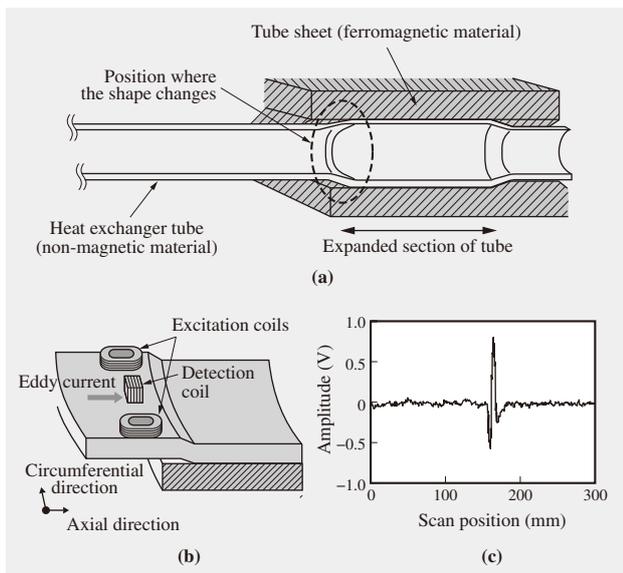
Eddy Current Testing System for Inspecting Heat Exchanger Tubes.
